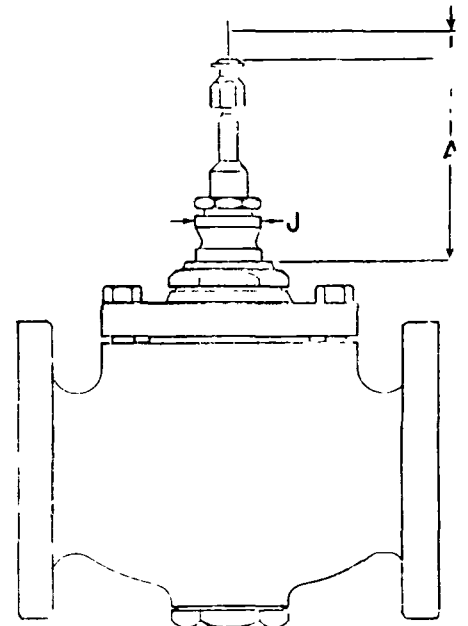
V5011B and F Flanged Body Dimensions in Inches (Millimeters) Refer to Table 3
